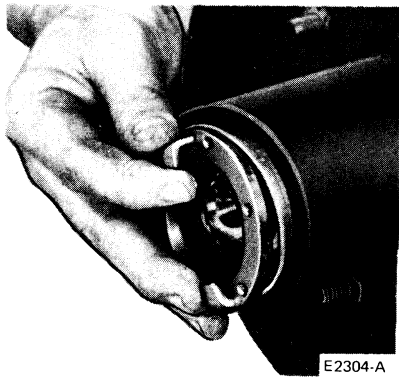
Installing Cam Body Ring into the Clutch Retaining Ring
